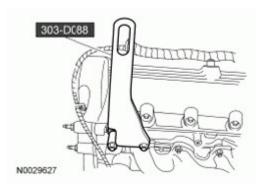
Installing Engine Lifting Bracket Set Courtesy of FORD MOTOR CO.
